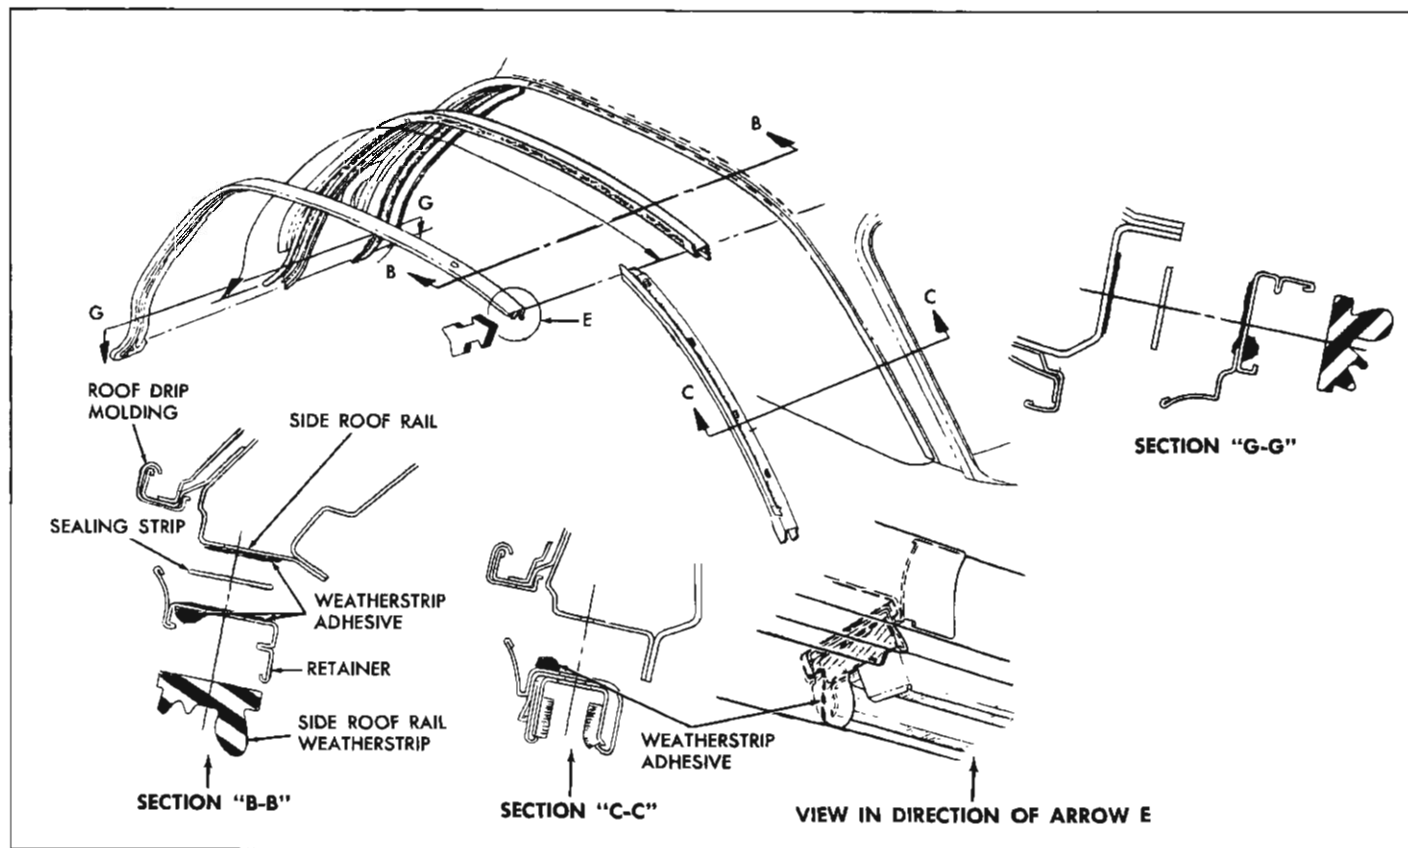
"37" Style Roof Rail Weatherstrip Assembly
